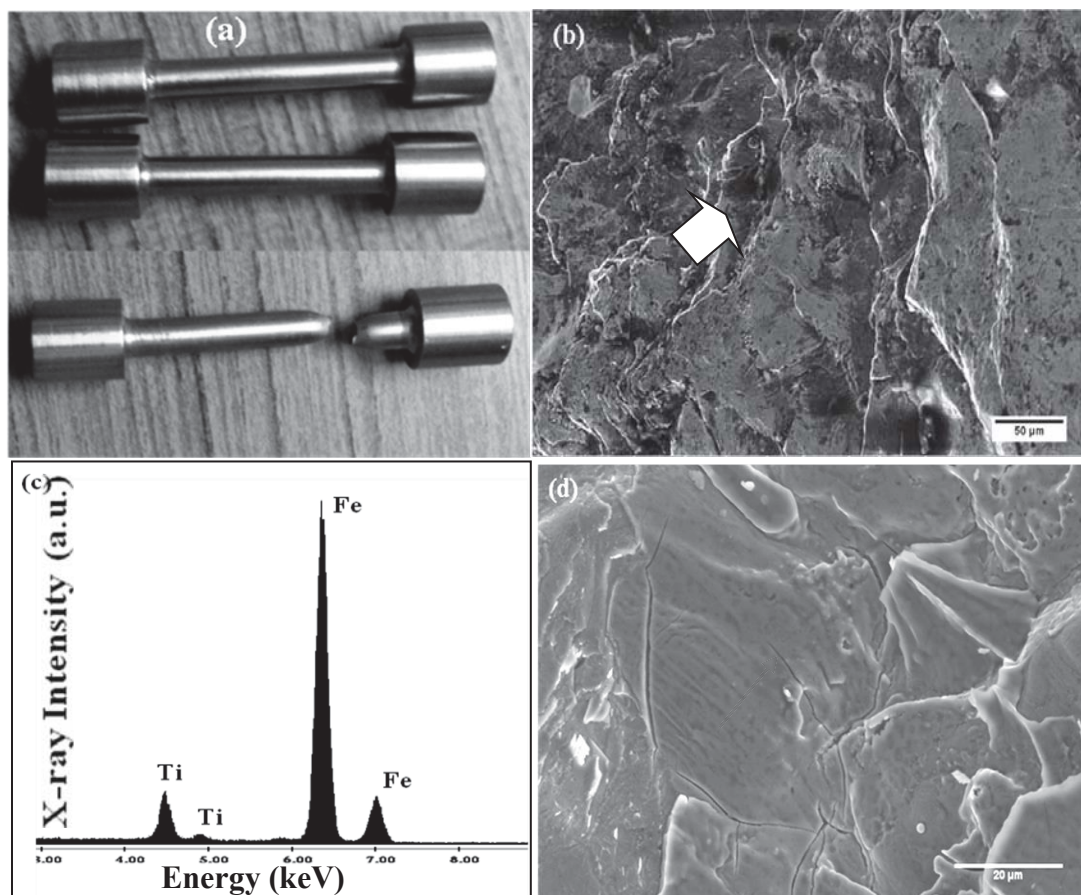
(a) Tensile specimens before and after testing, (b) SE image of fracture surface showing typical brittle fracture, (c) Fe rich EDX spectrum from the fracture surface confirmed failure on MS side and (d) microcracks on the fracture surface of the clads fabricated with a R value of 2.01
